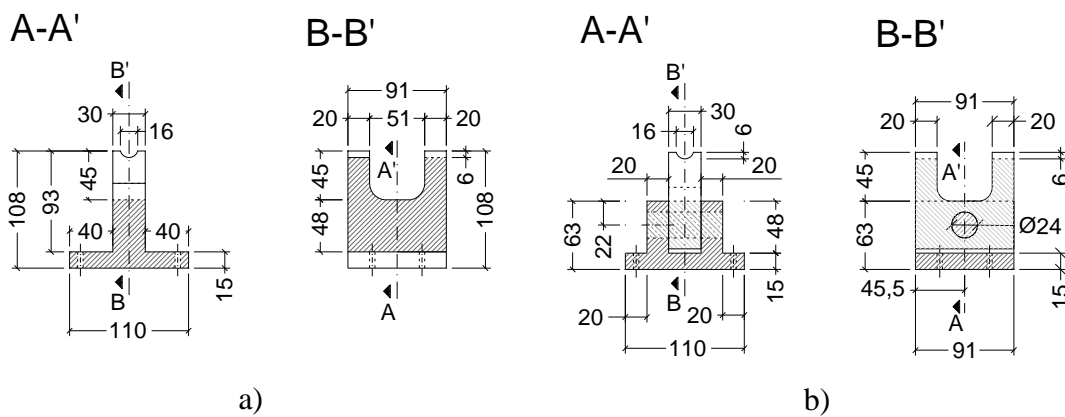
Testing beams supports: a) fixed support; b) adjustable support (dimension in mm)
